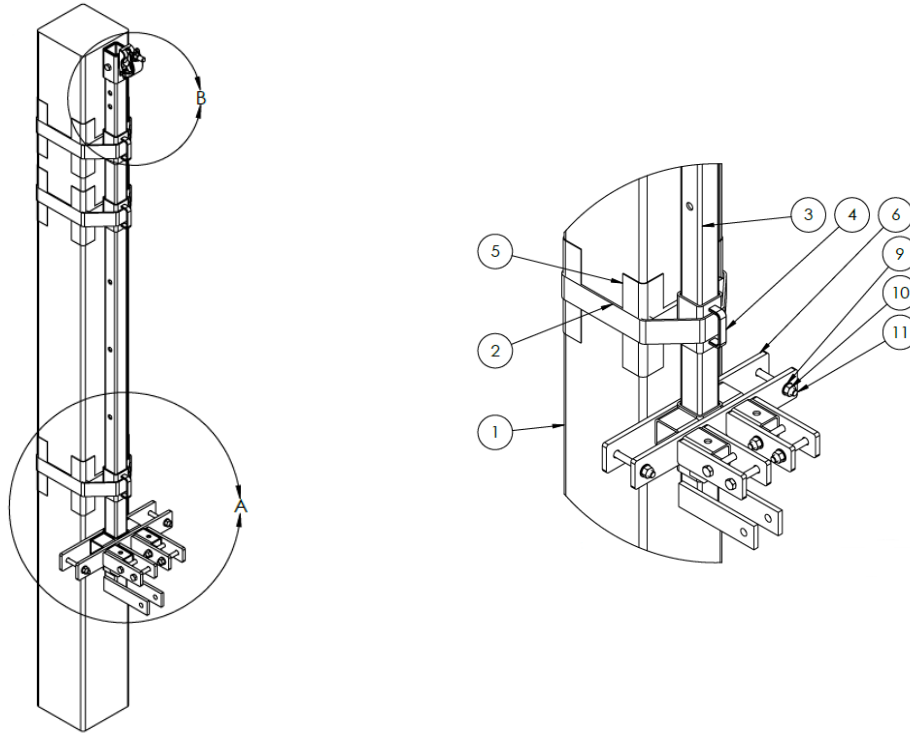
Vertical assembly set for pole mounting; 1 – pole, 2 – synthetic fibre strap, 3 - vertical assembly set , 4 - strap clamp, 5 - protective mat replaced by sleeve, 6 – bottom strut socket, 7 - upper tube joint, 8 - M12x80 hexagonal bolt, 9 - spring washer for M12 bolt, 10 - M12 nut, 11 - M12x100 hexagonal bolt
